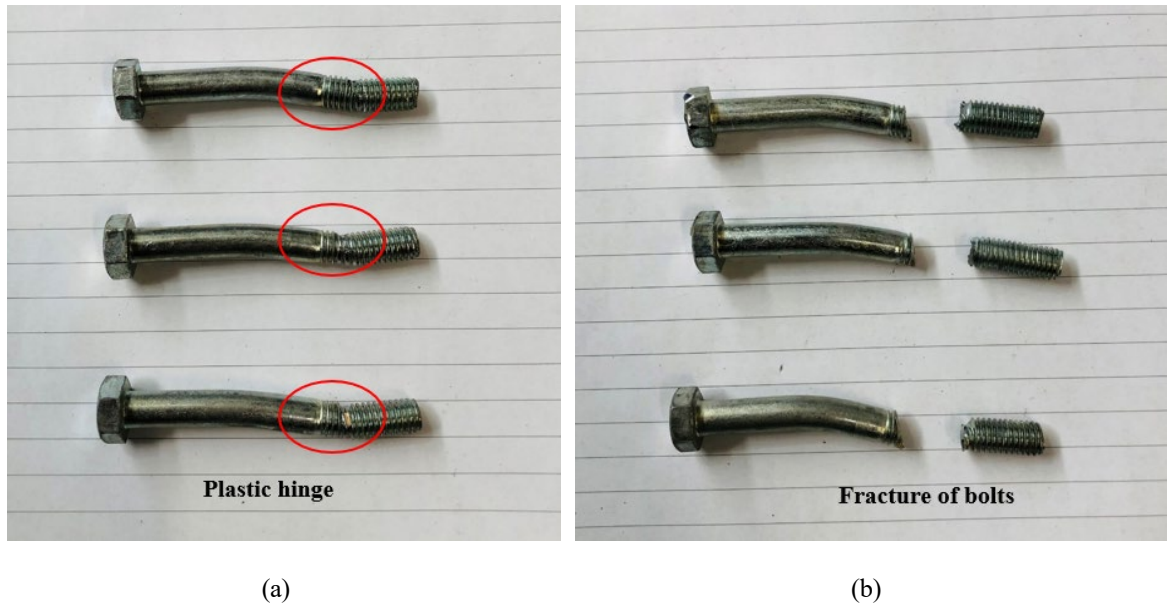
Failure modes of the specimens with M8 nut and bolts (with washers): (a) plastic hinge formation; (b) fracture of bolts
